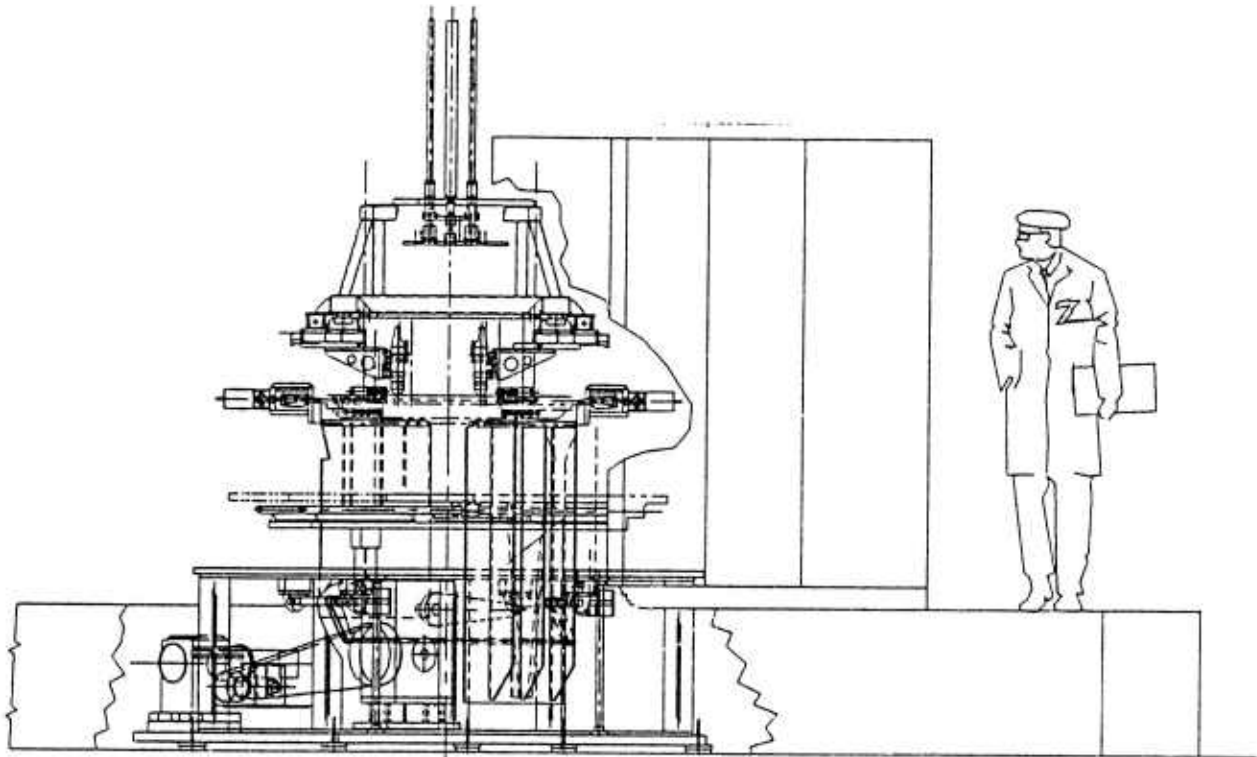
Side view of the large format stretch and weld machine
